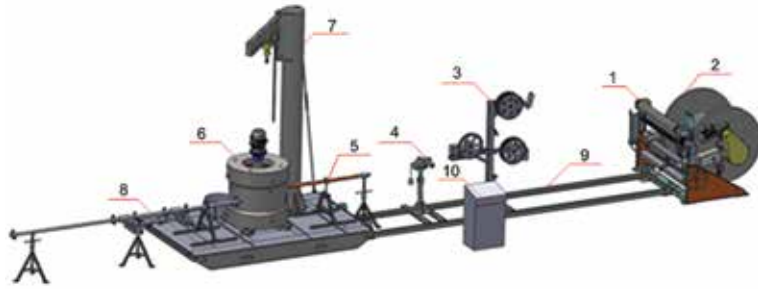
Cable injector manufactured by Pskovgeokabel
